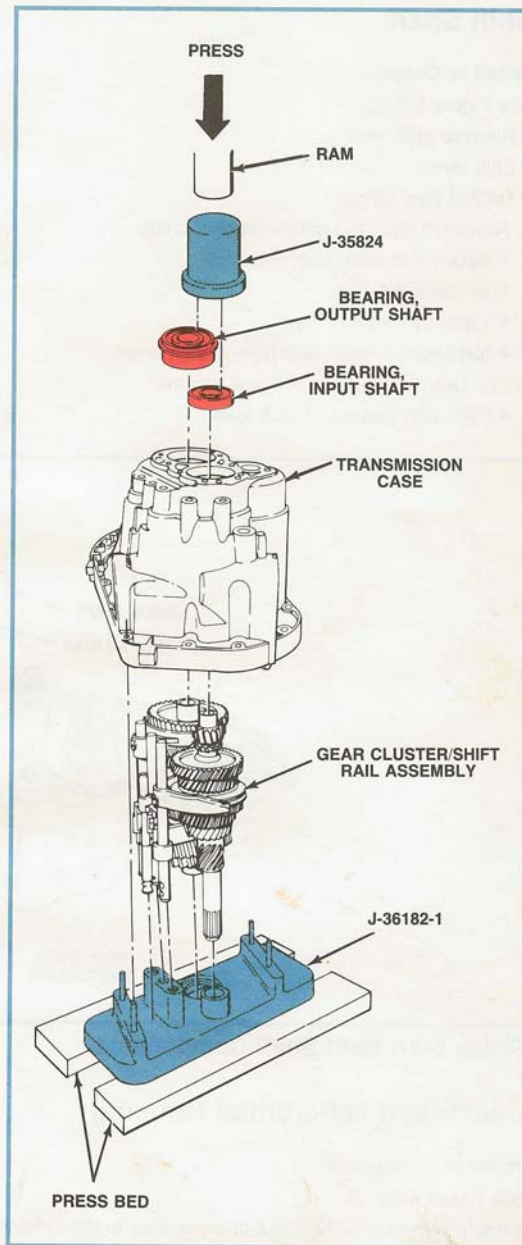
, Engaging Transmission in Gear Shaft Support Components Installation.
